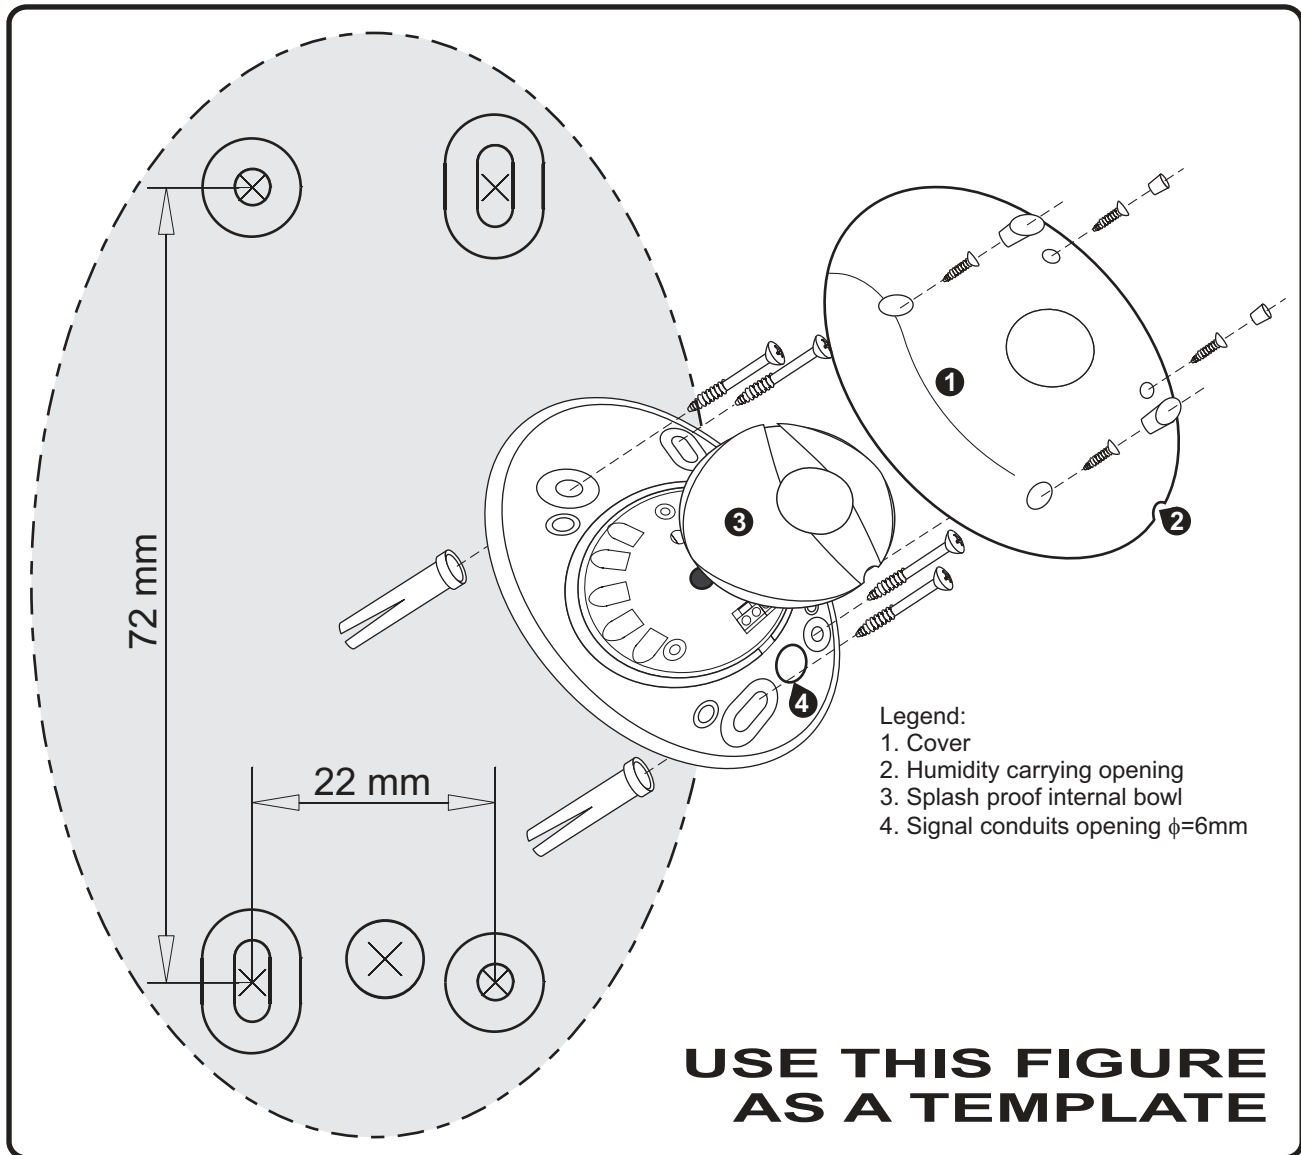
Assembly dimensions - scale 1:1, transmitter (receiver) assembly drawing
